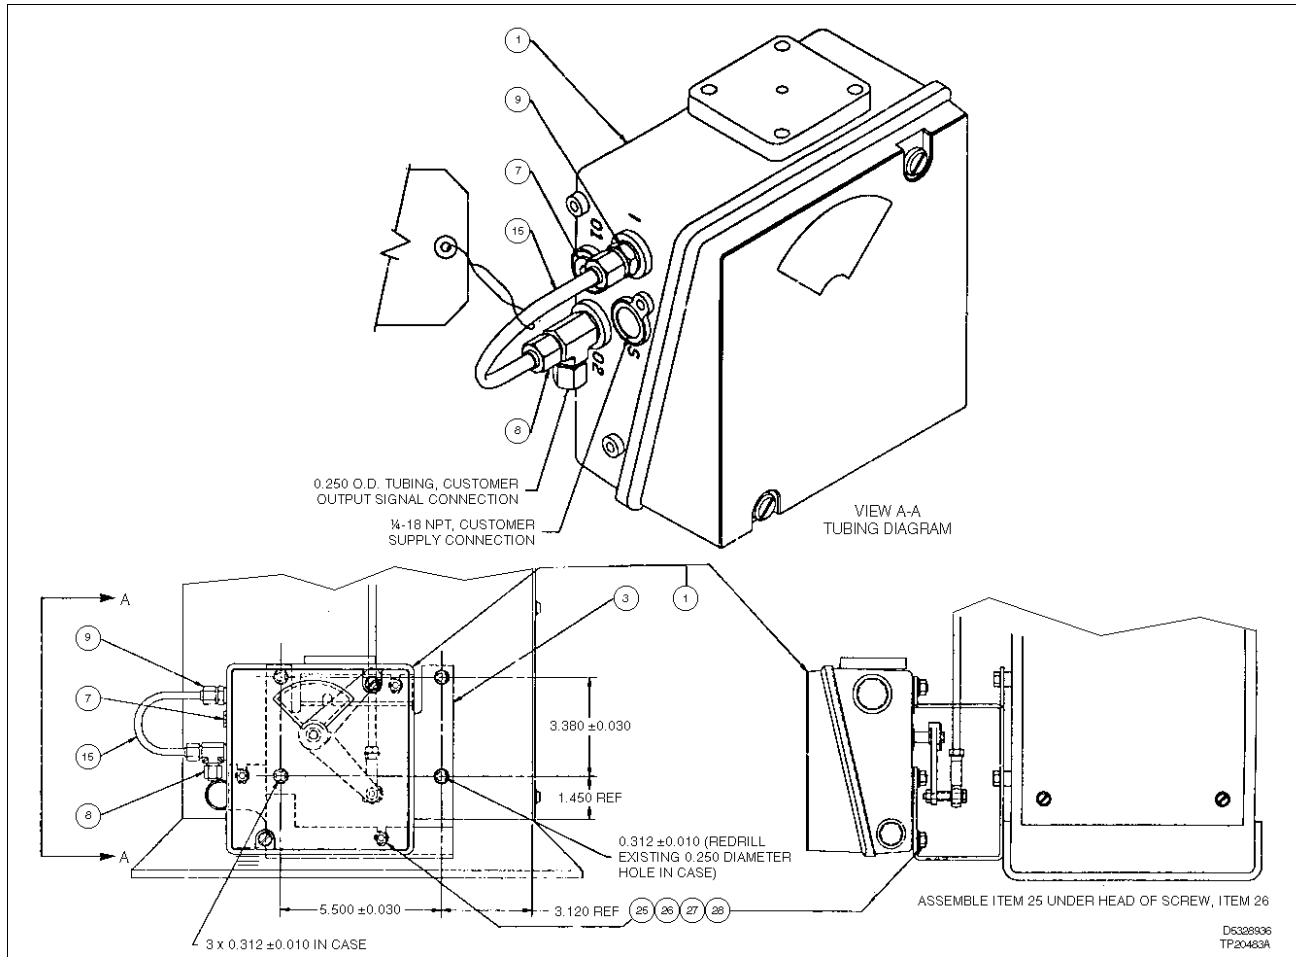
UP2 with Pneumatic Shaft Position Transmitter, Table A-15 (Sheet 2 of 2)
